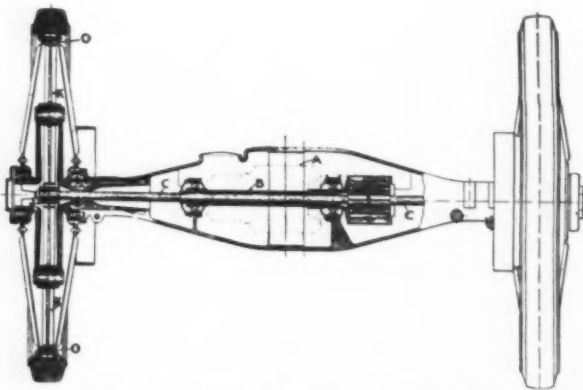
Sectional View of Whole Rear Axle Assembly of System in Which Motor, Differential and Transmission Members Are all Embodied as Parts of the Rear Axle and Wheel Assembly. A, armature; B, hollow armature shaft; C, C, axle spindles; J, spur pinion; K, K, intermediate gears; O, O, internal gear ring.
